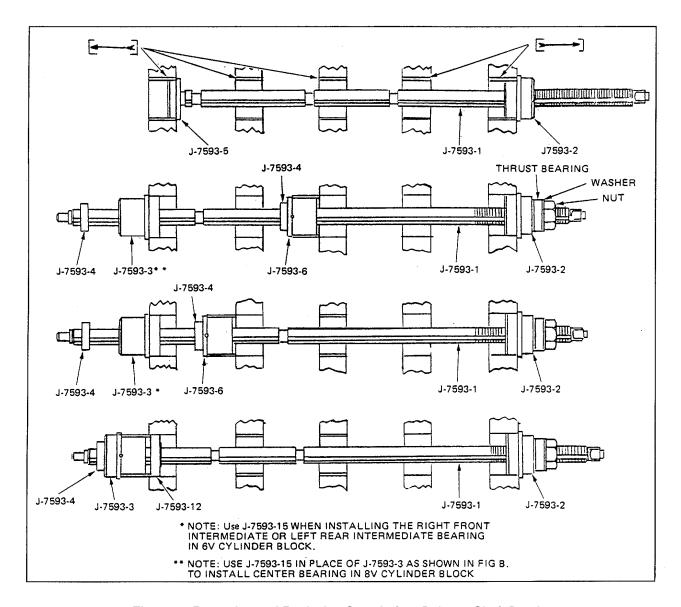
Removing and Replacing Camshaft or Balance Shaft Bearings
